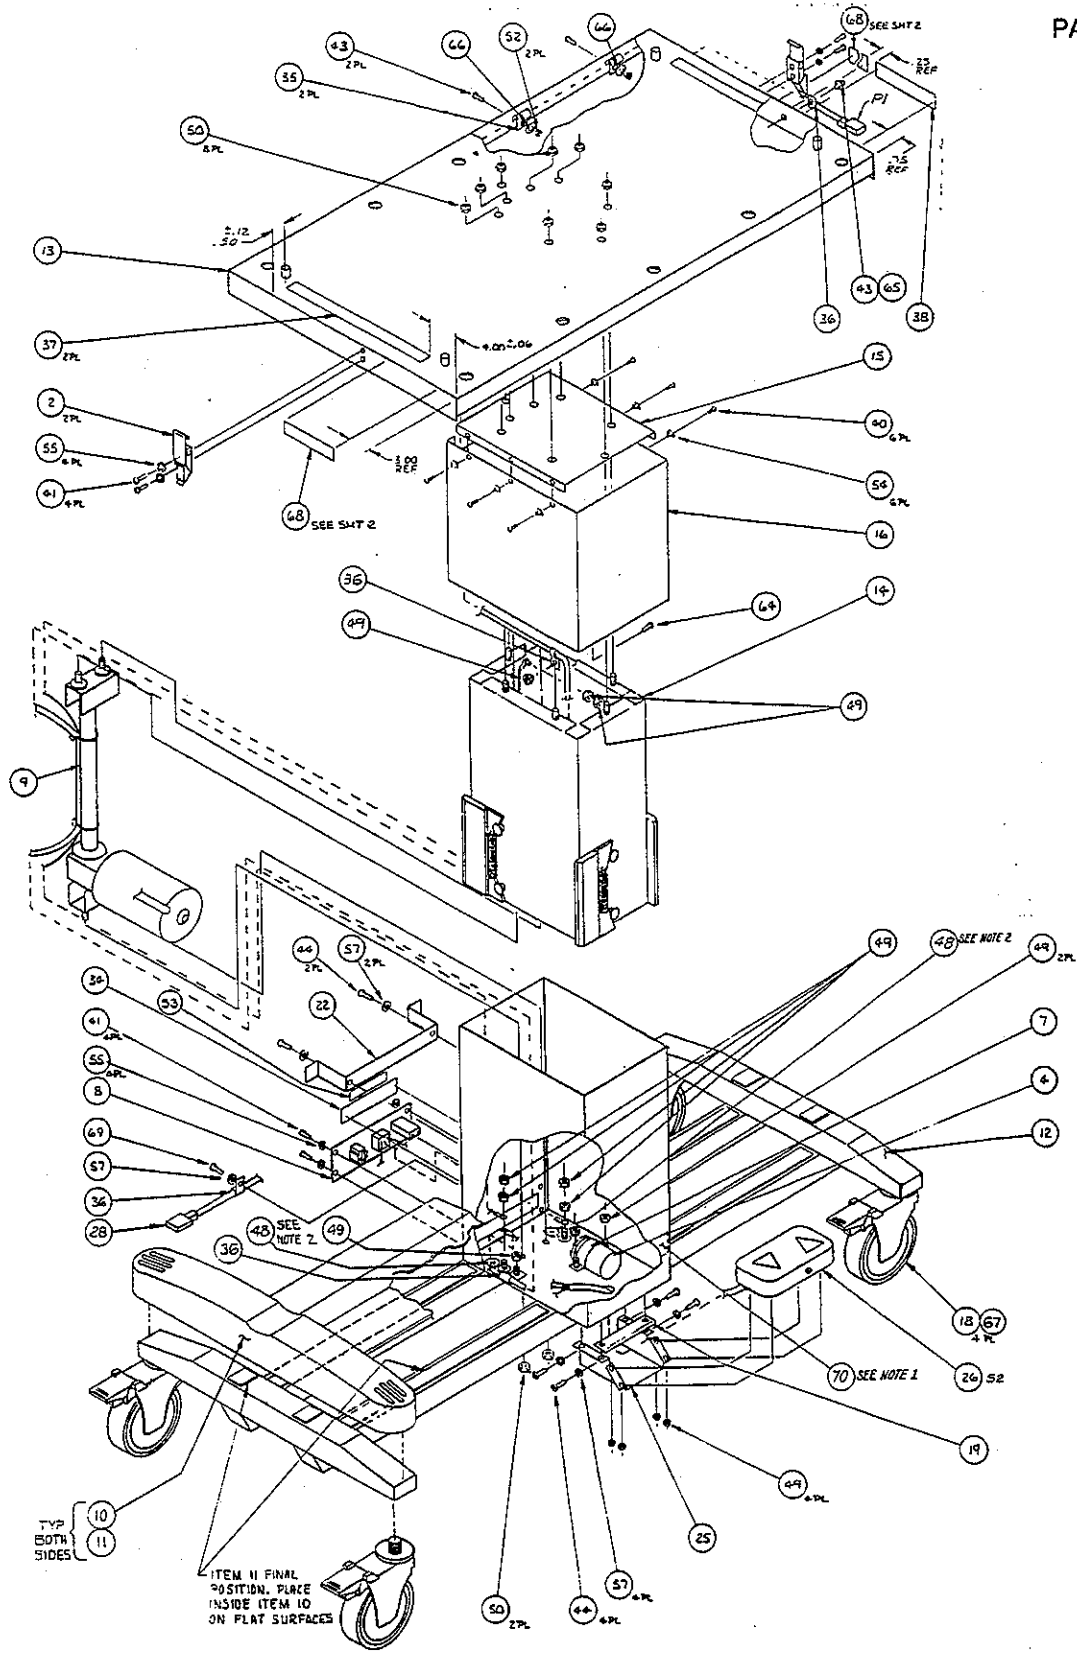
PARTS LOCATION DIAGRAM, VHA STAND ASSEMBLY (SHEET 1 OF 2)
